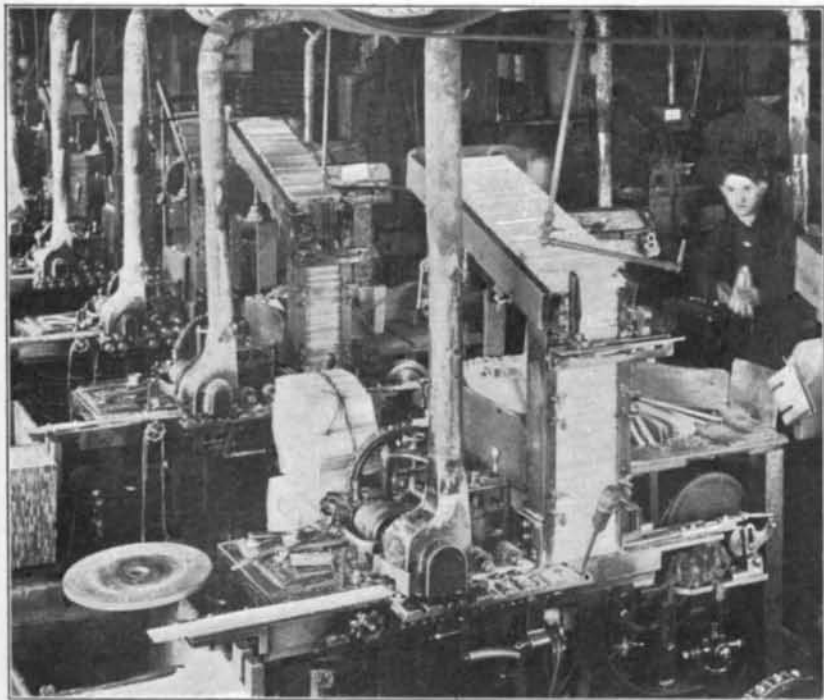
Machines for Grooving and Molding the Wooden Casings.
